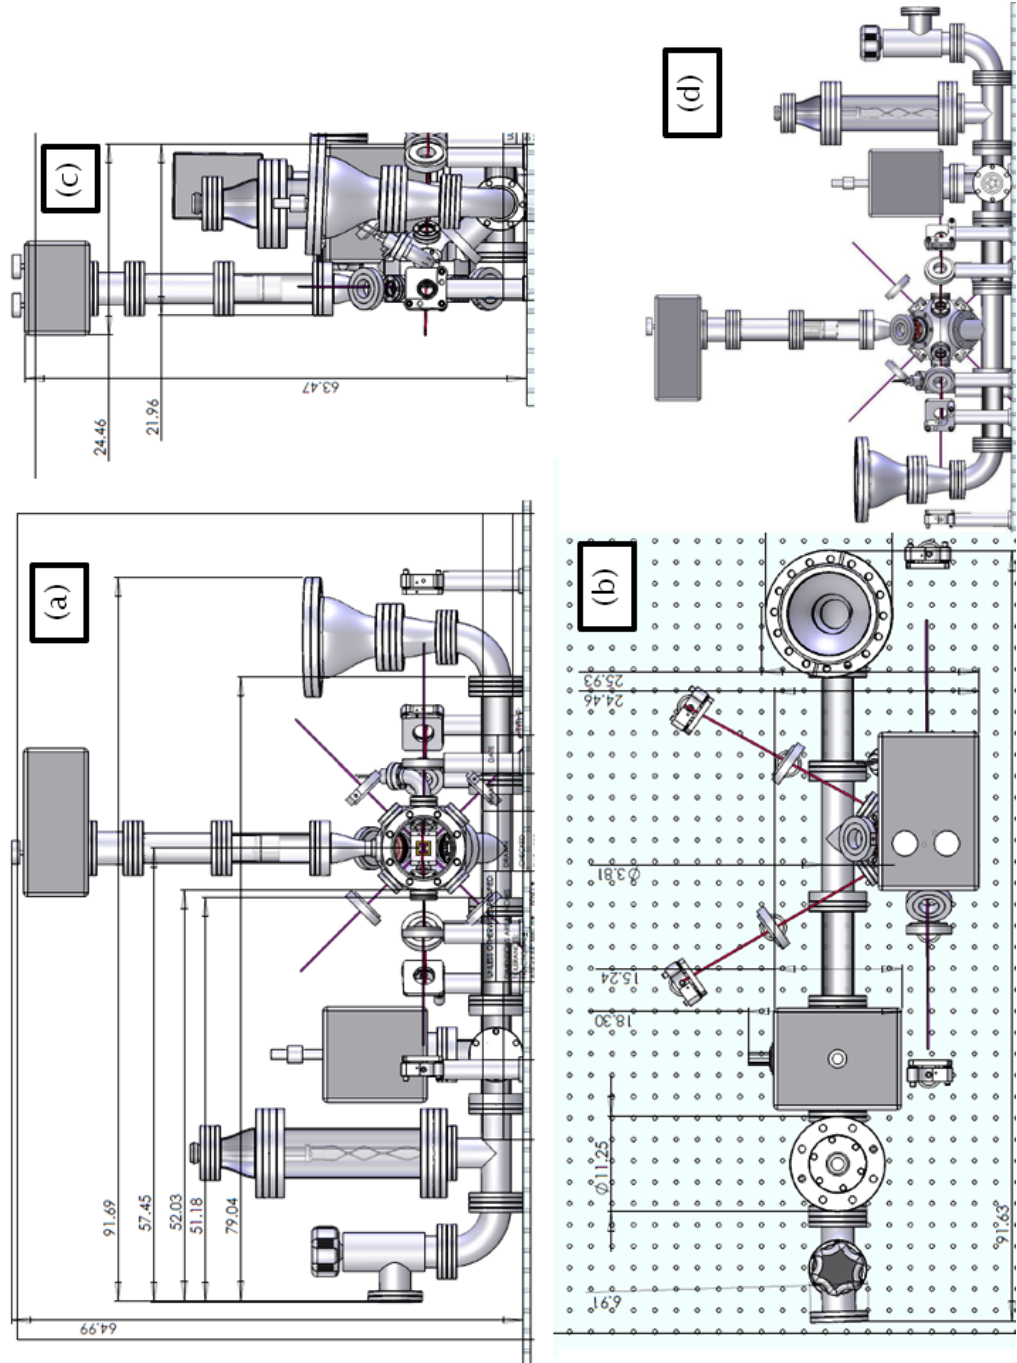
Dimensions of the UHV system: (a) Front view, (b) Top view, (c) Side view and (d) Back view.
